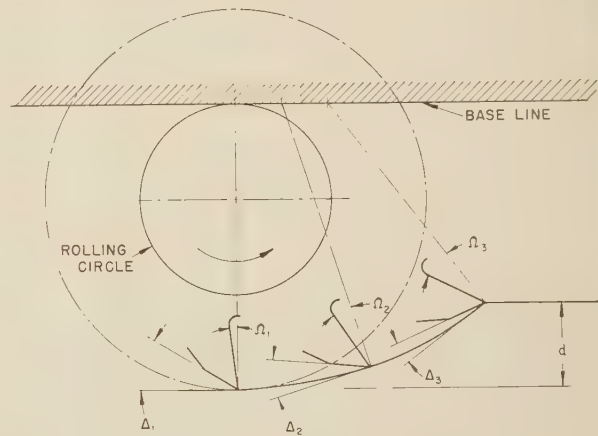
CHANGES IN CLEARANCE AND RAKE ANGLE WITH POSITION OF TOOTH ON ITS PATH
